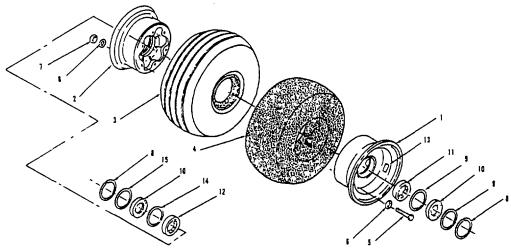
Wheel Assembly, Model 214-706-104-101
